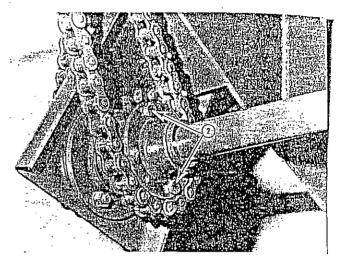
AUGER DISCHARGE SHEAR BOLT
